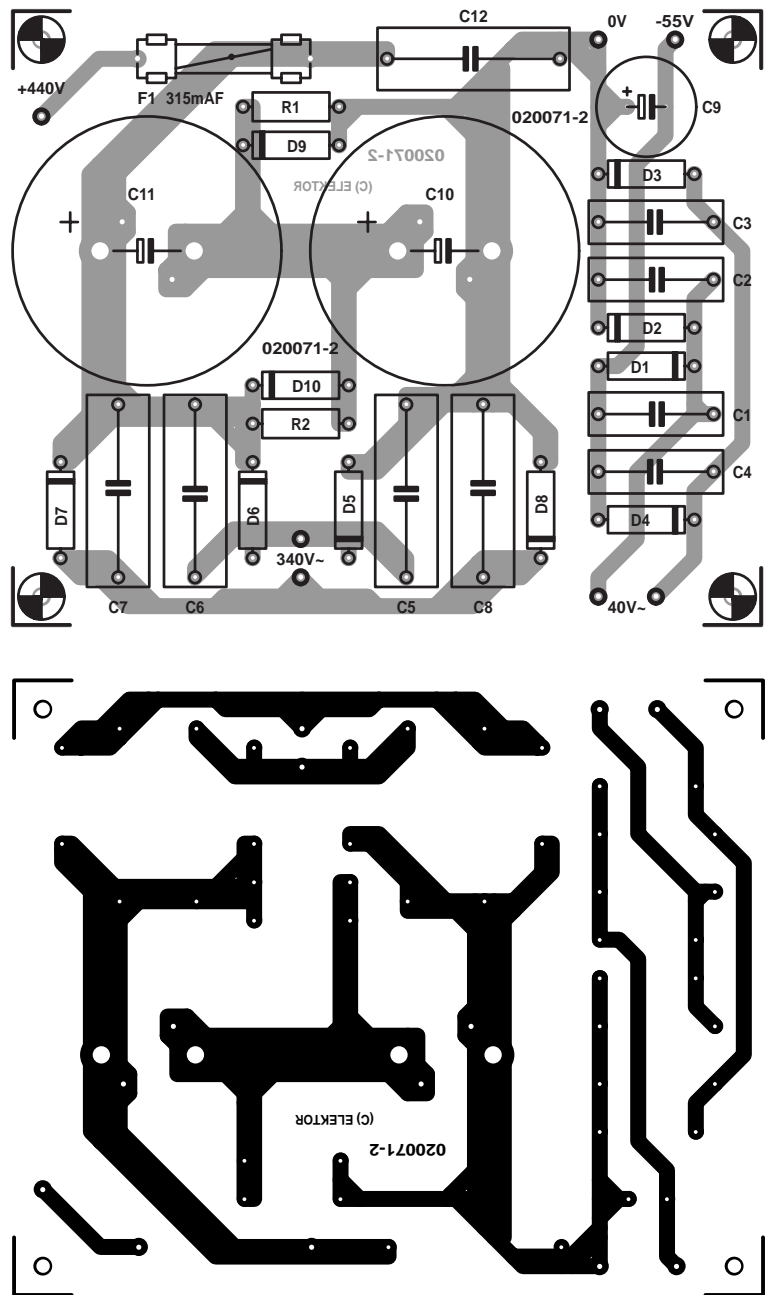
Copper layout and component layout of the printed circuit board for the power supply.
